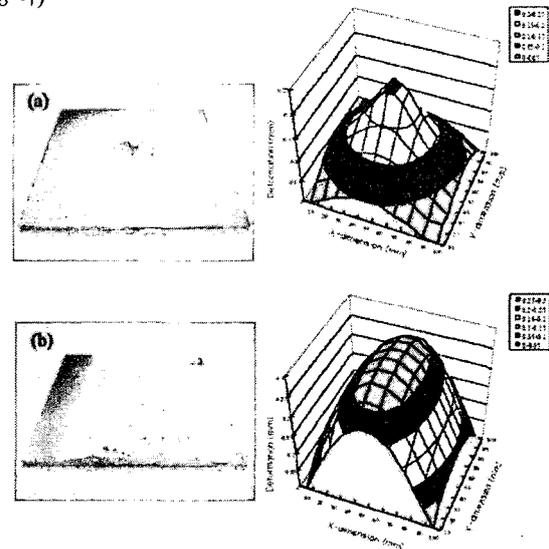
Cold spray deposition specimen and measured deformation of aluminum plate caused by cold spray deposition: (a) a locally deposited specimen and (b) an areally deposited specimen
